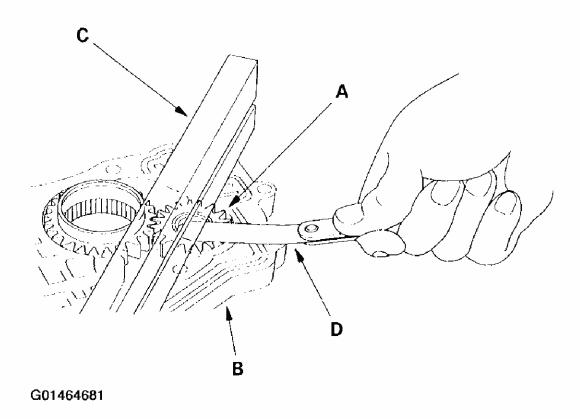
Measuring The Thrust Clearance Between The ATF Pump Driven Gear & The Valve Body
